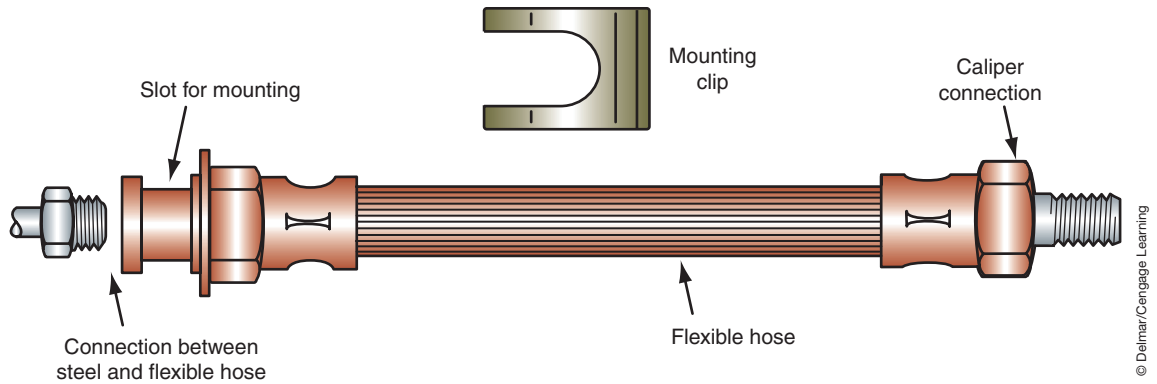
A flexible hose provides a connection between the vehicle's rigid frame and the movement of the wheel and suspension assemblies.
